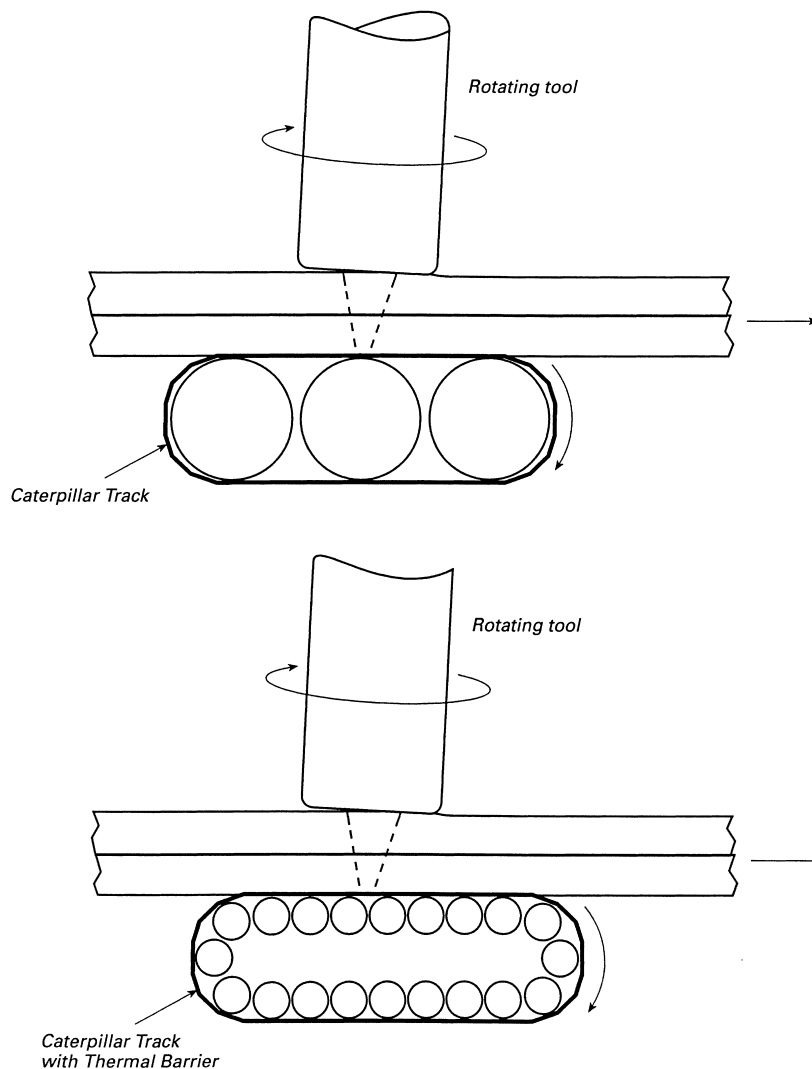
FSW seam welding of lapped sheet with roller \ track support
